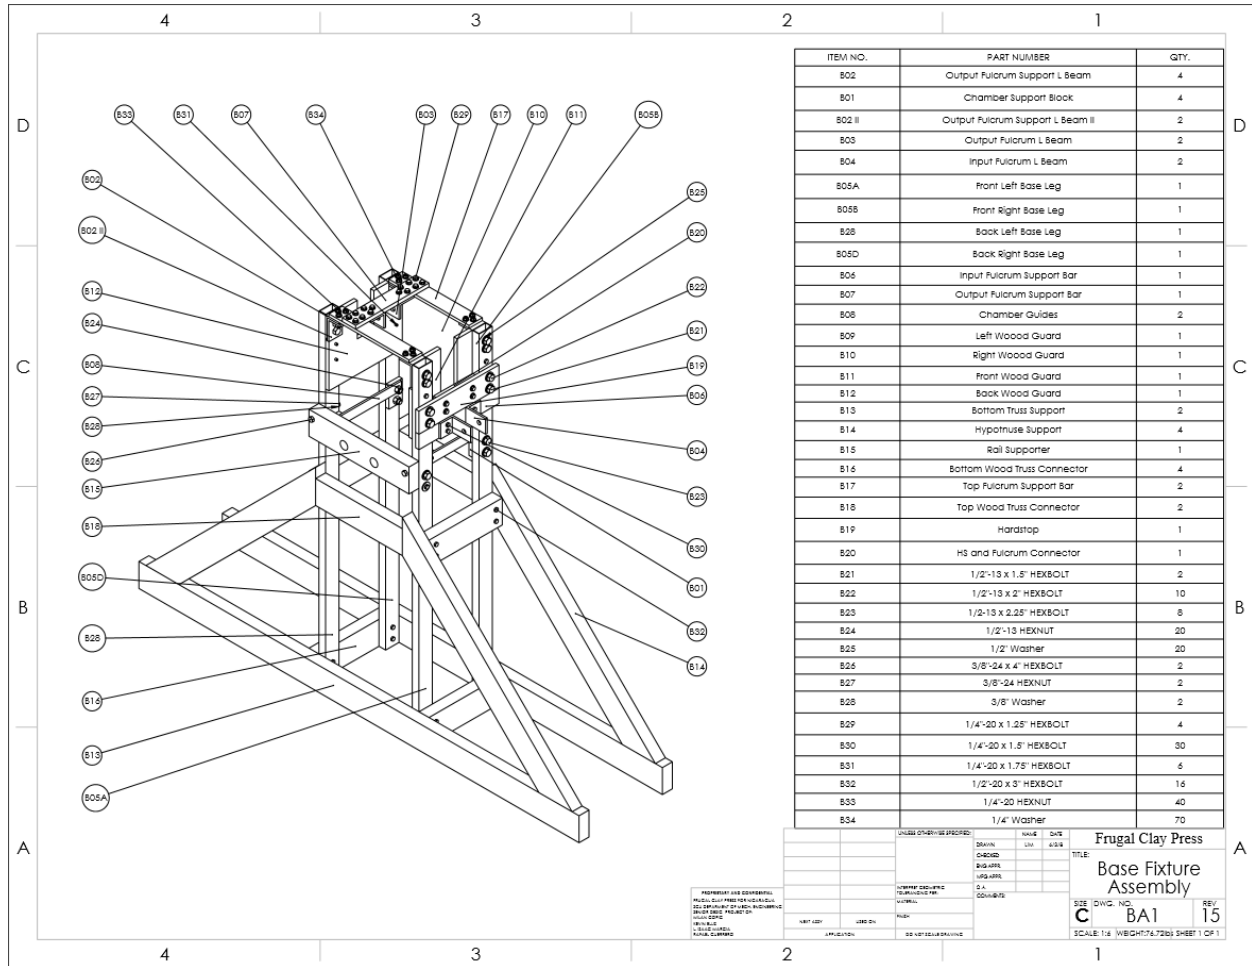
Base Fixture subsystem mechanical drawing. Authored by L. Marcia.
